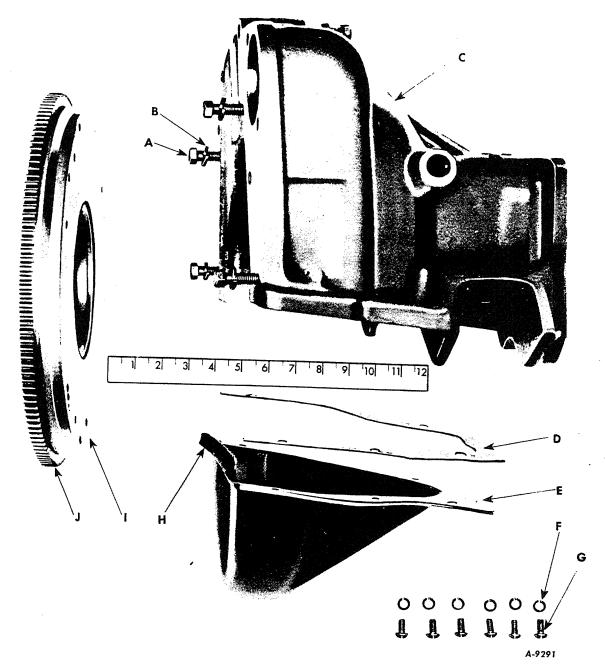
ENGINE FLYWHEEL AND HOUSING
